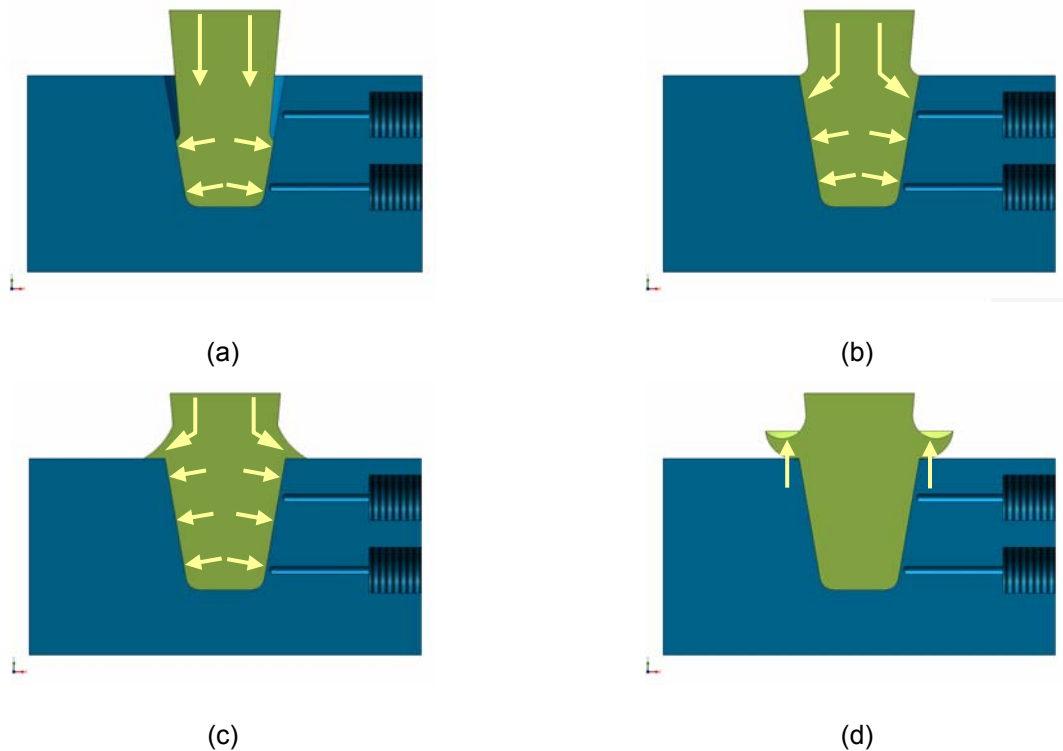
Proposed bond formation mechanism of AE42/AZ91D-T6 welds.
